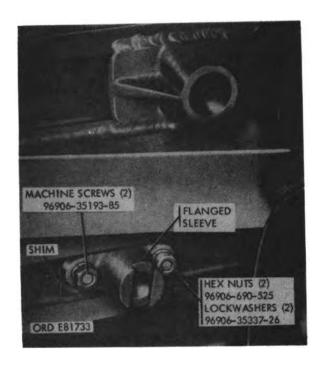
Removing or installing anchor pin flanged sleeve.
